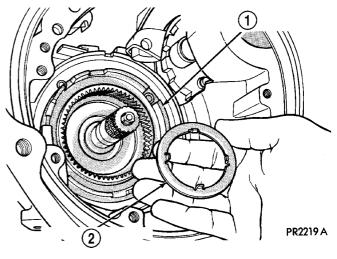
No. 10 Thrust Washer 1 - OVERRUNNING CLUTCH CAM ASSEMBLY
